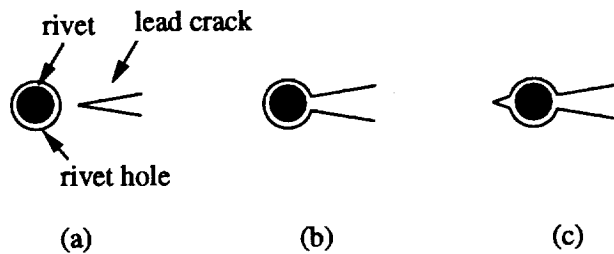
Illustration of crack propagation near rivet: (a) lead crack approaching rivet (b) lead crack growing into rivet hole, and (c) new crack initiating out of rivet hole.
